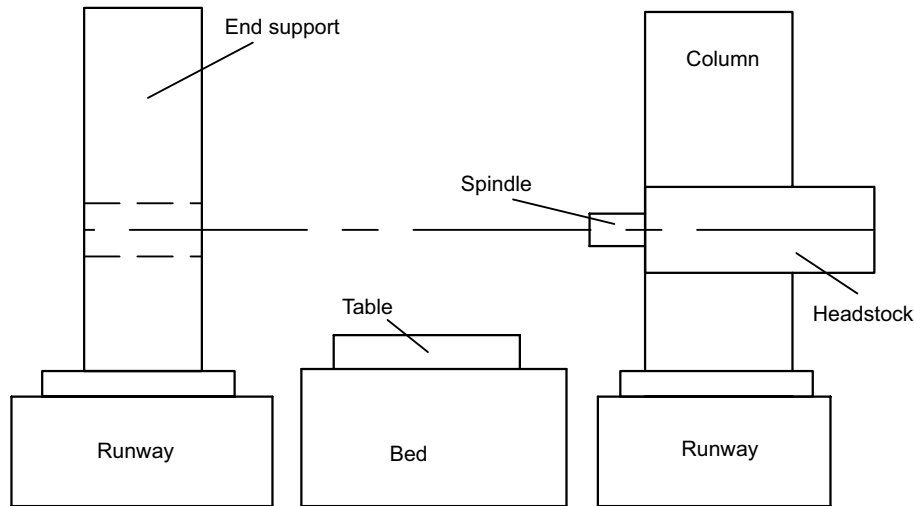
Schematic of a table type Horizontal Boring machine
